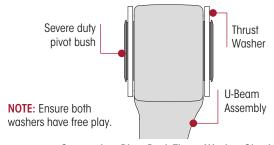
Severe-duty Pivot Bush Thrust Washer Check
